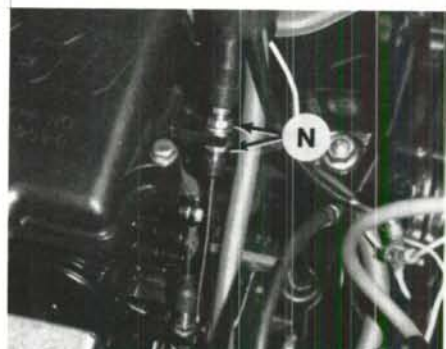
Rotate locknuts (N) up or down cable housing end as needed to adjust throttle lever free play. Model JF650 is shown. Throttle cable on Model JS650SX is routed from the bottom.
